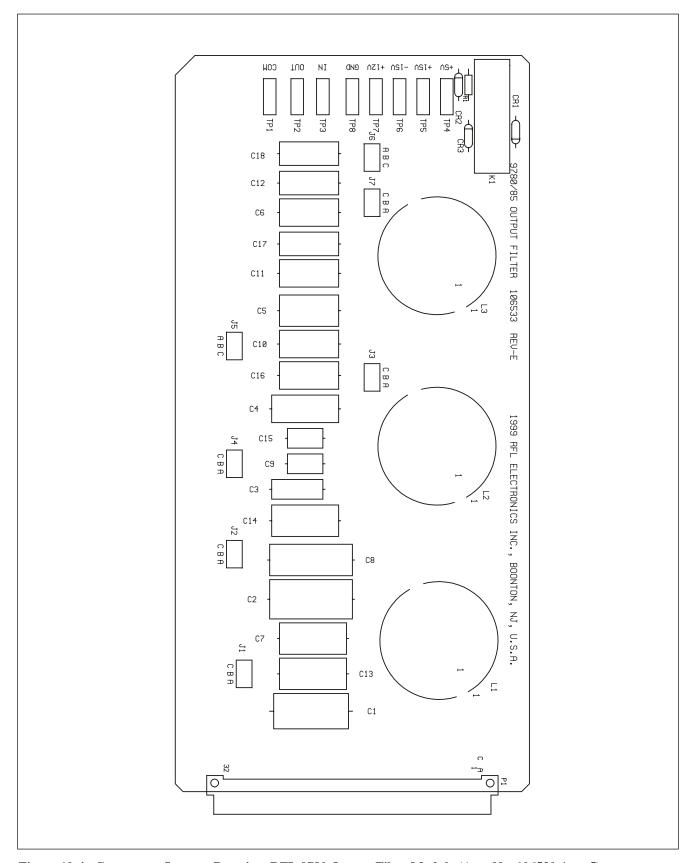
Component Locator Drawing, RFL 9780 Output Filter Module (Assy No. 106530-1 to -5)
